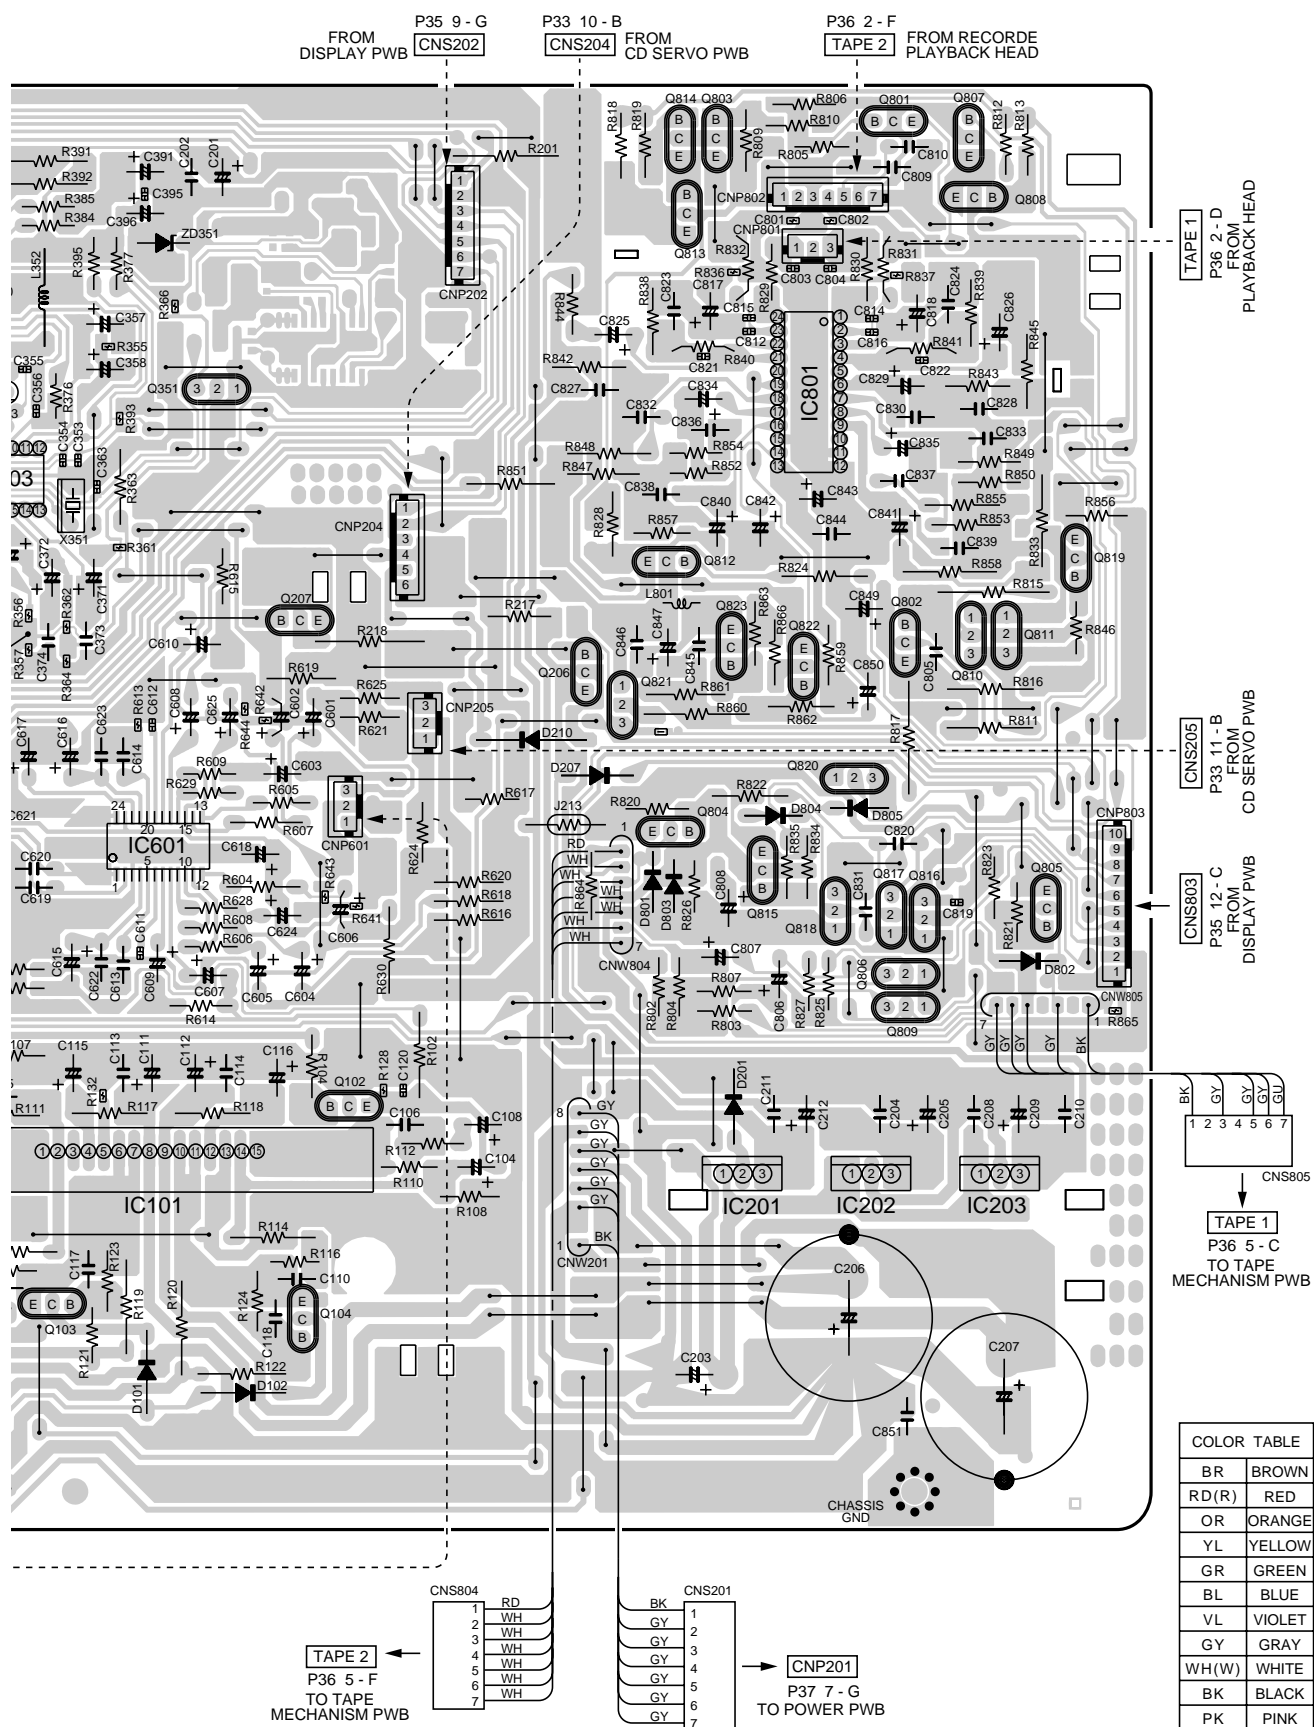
WIRING SIDE OF P.W.BOARD (2/8)
